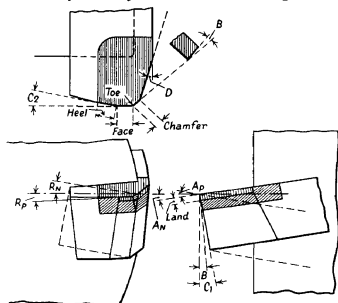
NOMENCLATURE OF MILLING CUTTER
